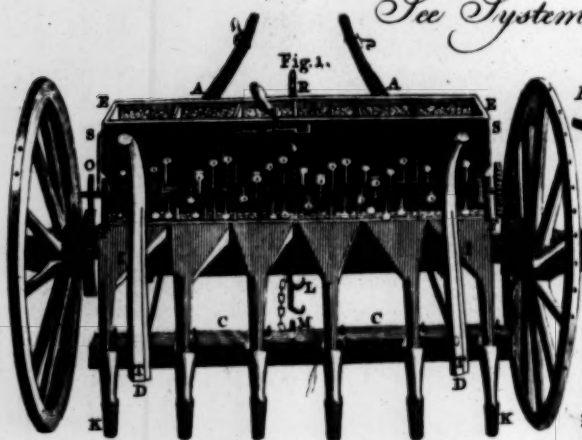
A back View of Cooks New Improved Drill Machine, showing the manner in which 3 Seed is taken up by 3 Caps, & thrown into 3 Funnels.
